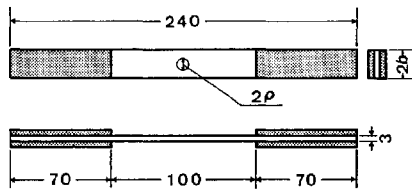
Shapes and dimensions of tensile test specimens (unit: mm). $2b$: Width of specimen. 2ρ : Diameter of central hole.
